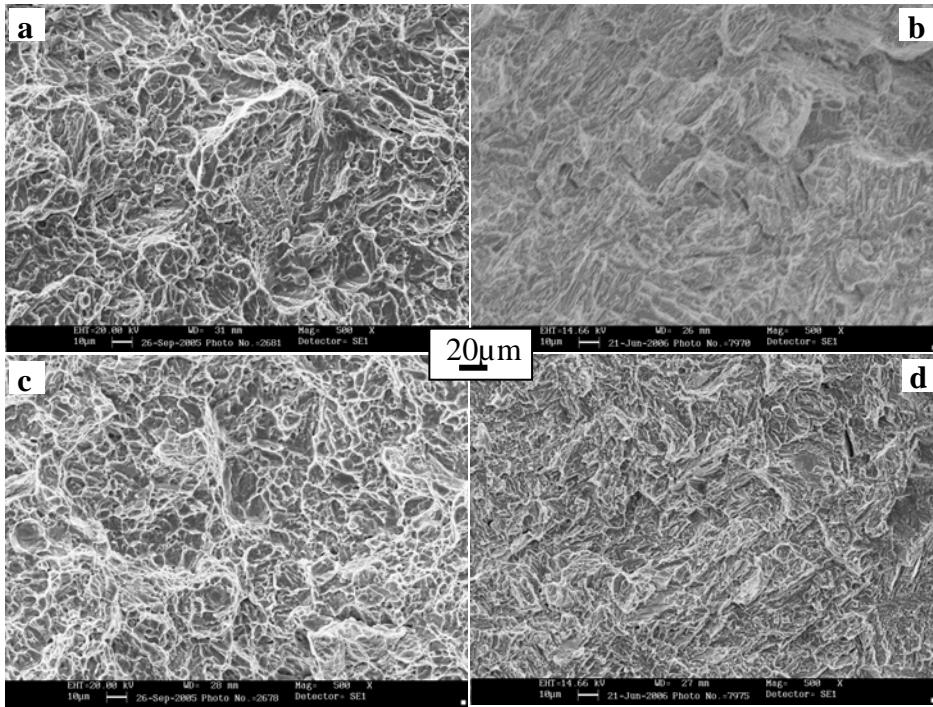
Fractographs of electron beam welded a) STA (OQ) +AW Notch tensile
